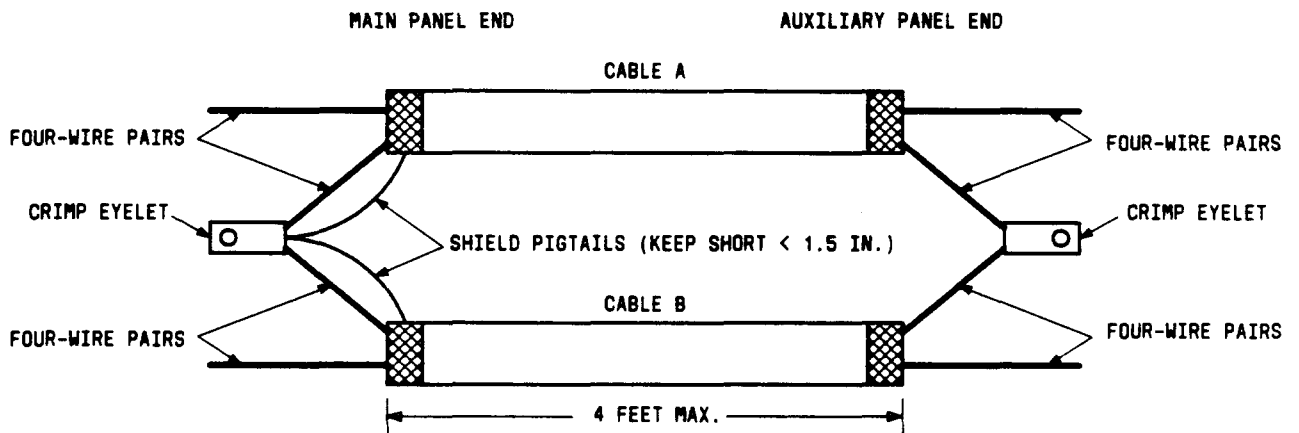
Cable Dressing for AHG2B Auxiliary Panel
